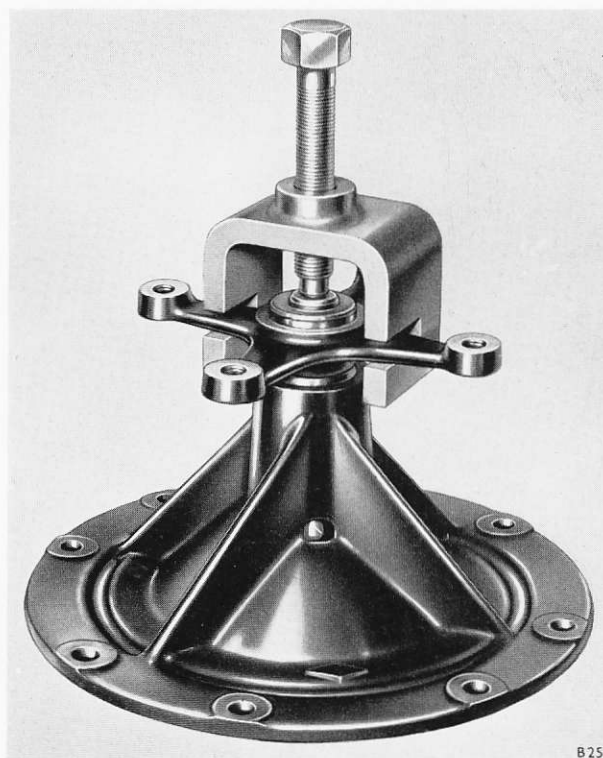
Extractor — Coolant pump driving spider (S2 cars) (RH.7099)
